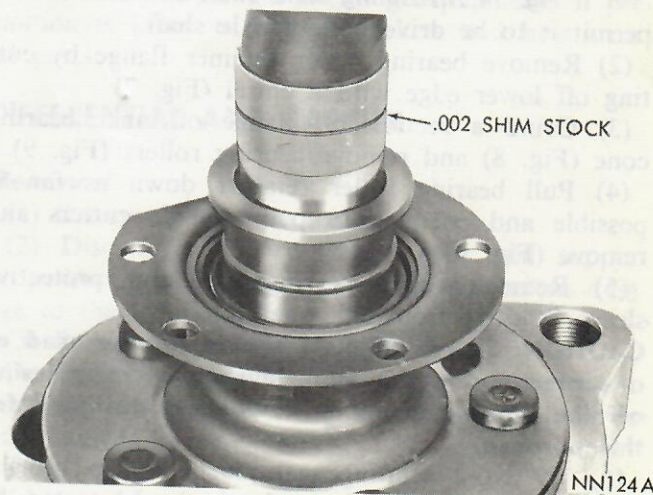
Seal Journal Protection bearing journal and thereby weakens this area.
